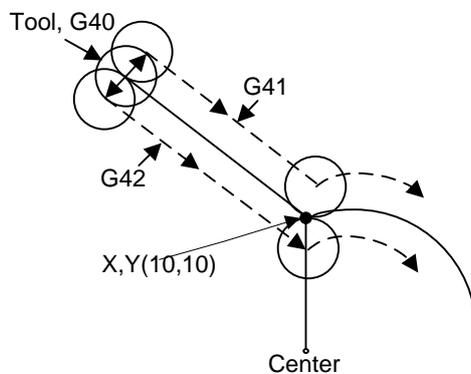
Schematic Diagram of Tool Compensation Machining
